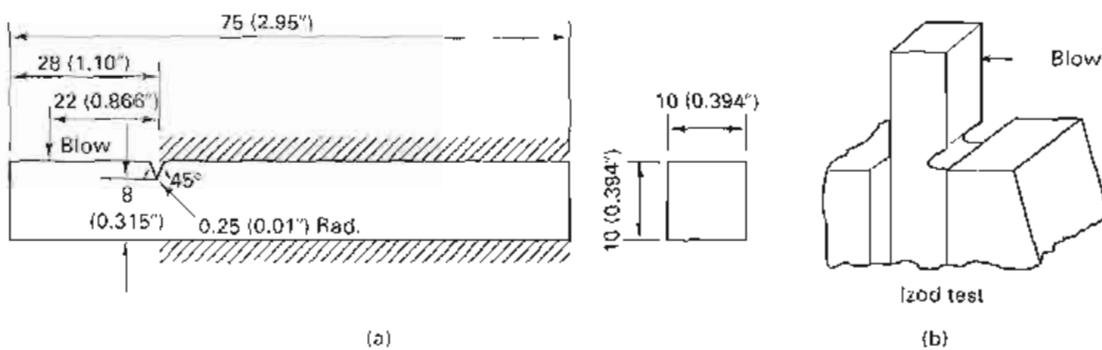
(a) Izod impact specimen; (b) cantilever mode of loading in the Izod test.
